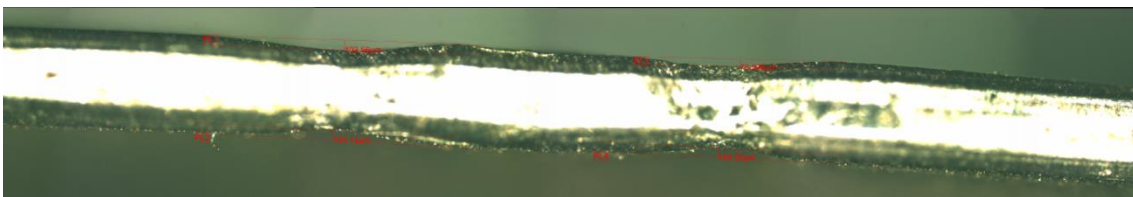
Necking at weld on either side of the weld seam in transition zone to HAZ – 1.1mm RF profile
